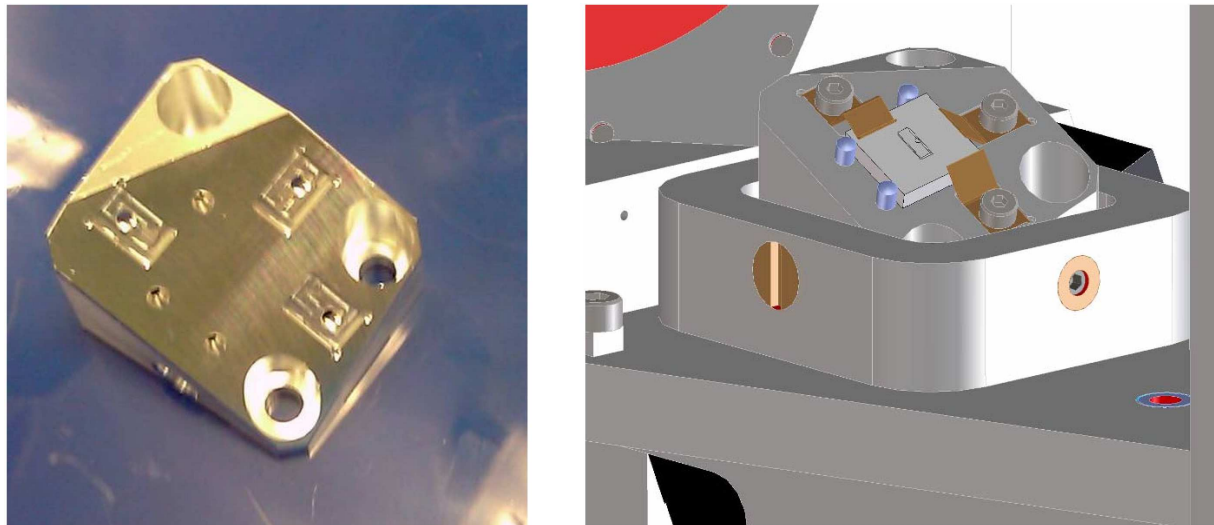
Left: Image of the roof-prism mount without clamps. Right: Drawing of the mount in the fiber coupler. The lateral position of the prism can be adjusted by alignment screws on the side of the mount.
